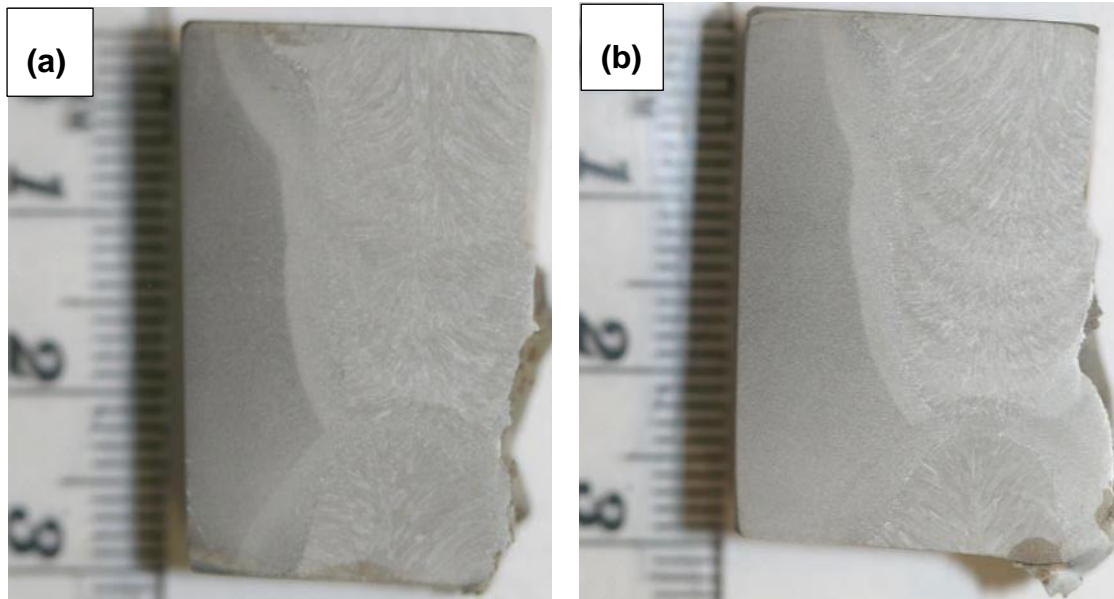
Macrographs of X70 SAW Welds CTOD (a) weld 1 and (b) weld 2
